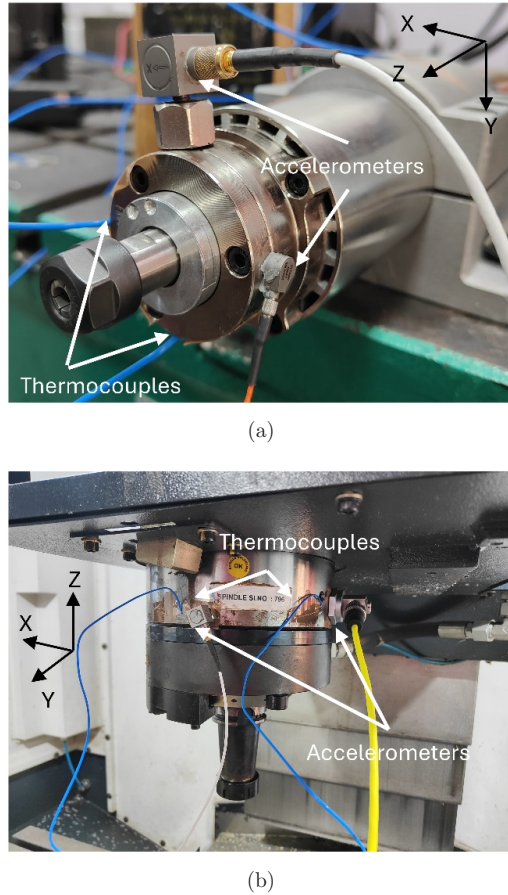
Experimental setup to measure accelerations and temperatures of (a) a motorized 0.8 kW, 24000 rpm spindle mounted on a test bench, and (b) a directly driven 18 kW, 15000 rpm spindle mounted on a CNC machine.
